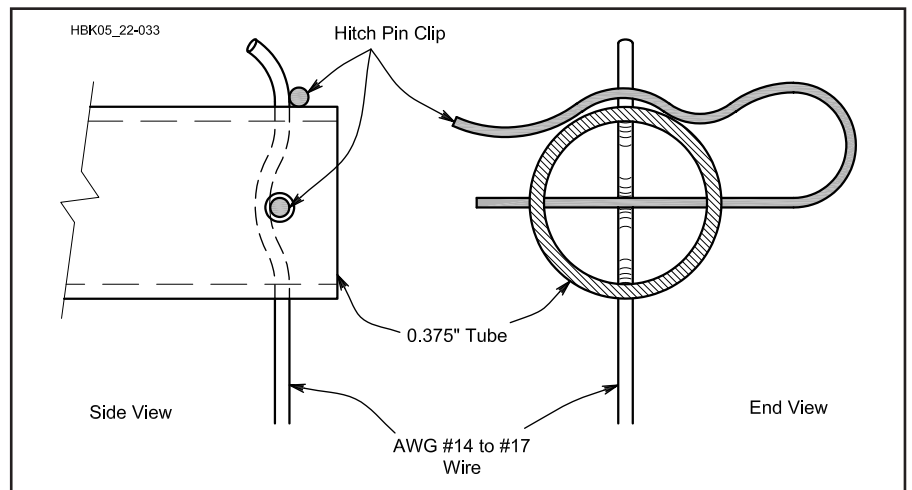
A simple method of clamping the end wires to the $\frac{3}{8}$ -inch tube end using a hitch pin clip.
